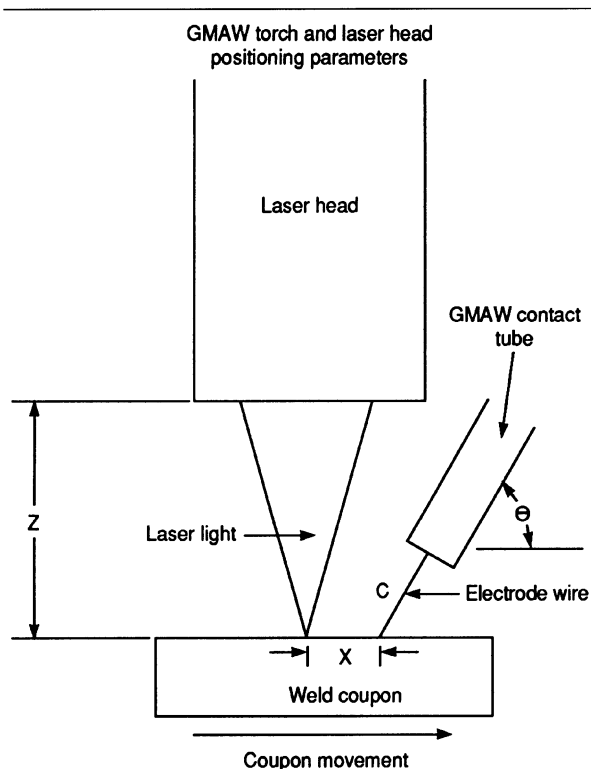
Schematic view of welding head used for laser-assisted arc welding, incorporating laser-focusing mechanism and GMAW torch.
